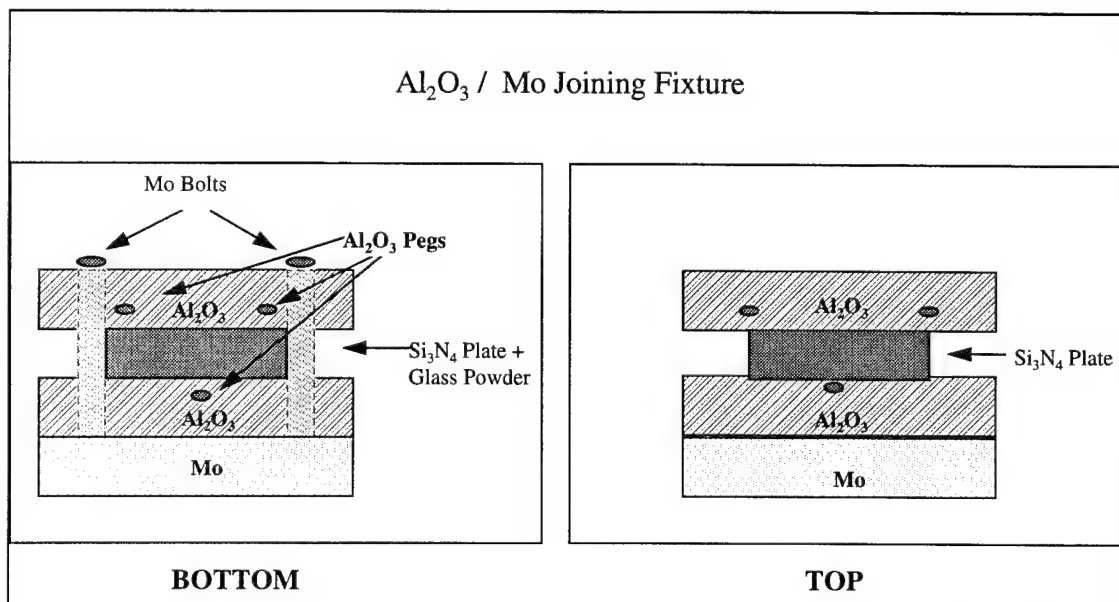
Al_2O_3 /Mb Fixture and Setup
